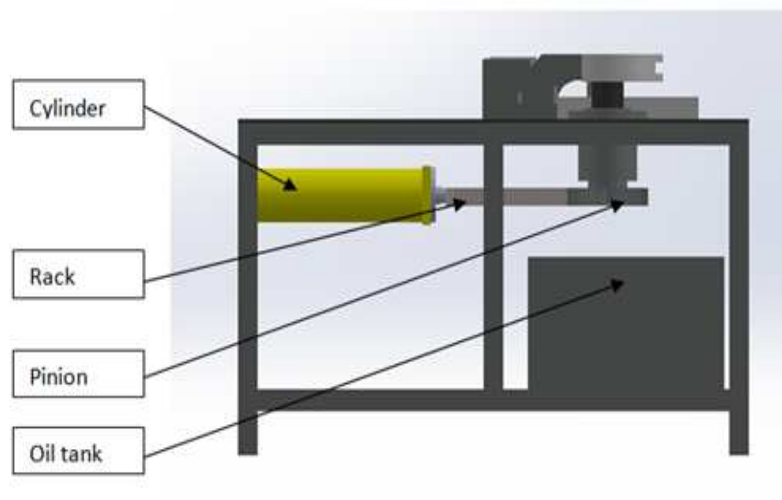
Sectional View of Rotary Pipe Bending Machine.
